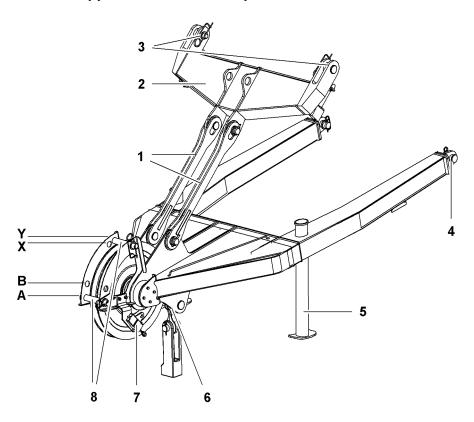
Auxiliary jib (79300 lb) for the boom head section
